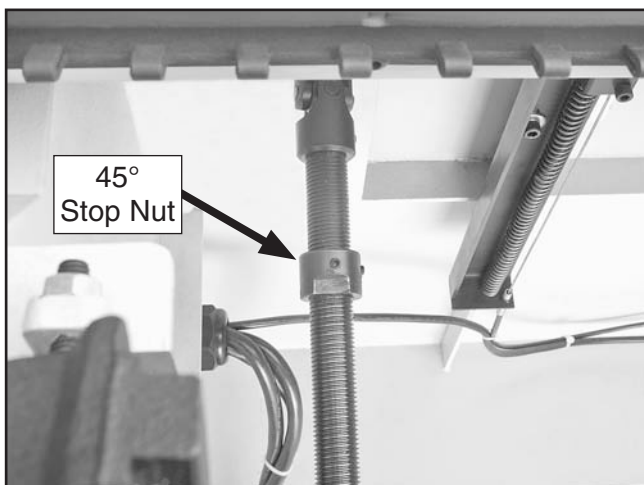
Tilt leadscrew 45° stop nut (viewed with main table removed for clarity).
